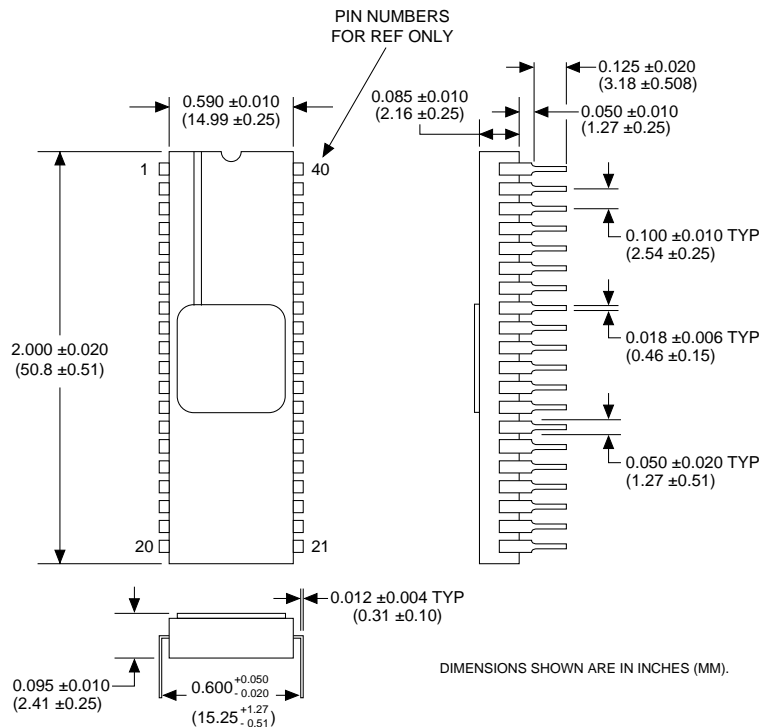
RDC-19220 (40-PIN DDIP) CERAMIC PACKAGE MECHANICAL OUTLINE
